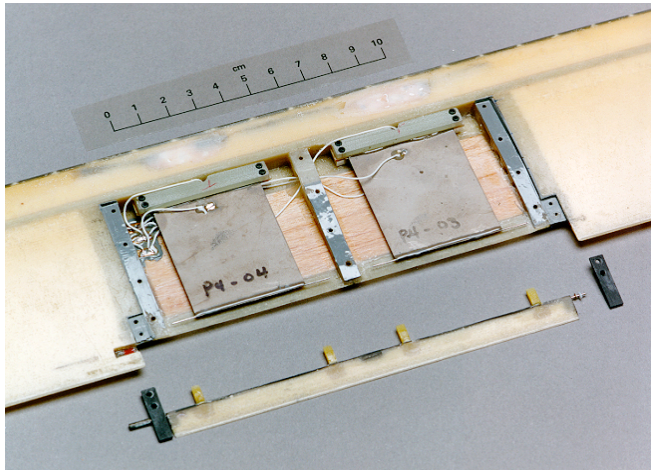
Close-up of the active section with the access panel removed and the elevon disassembled.
